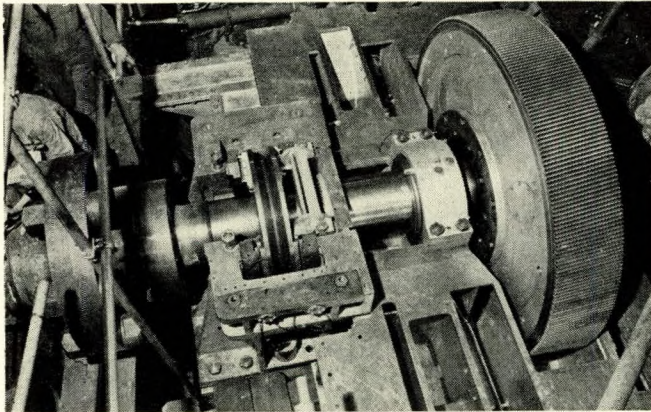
Y.E.A.D.1—Gearcase with top half removed
